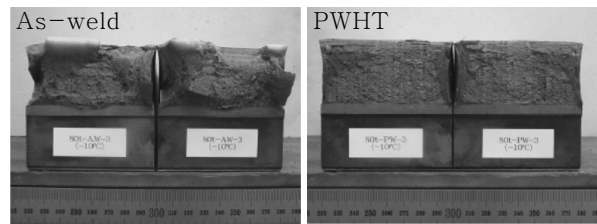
Fracture surface obtained by CTOD at -10°C
